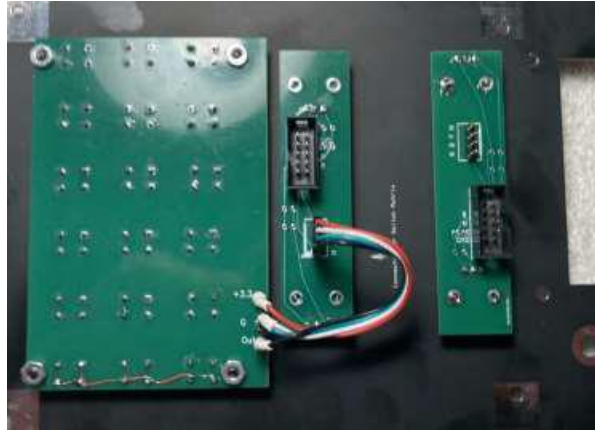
Encoder boards and switch assembly mounted on back panel.
